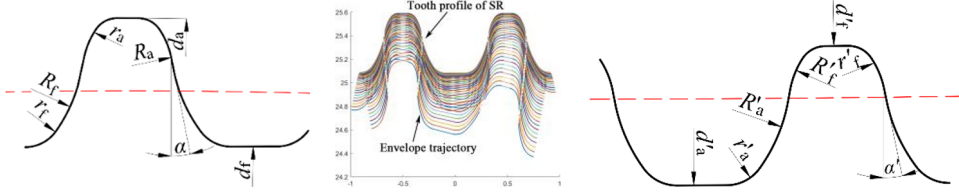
Illustration of: (a) small module tooth (b) tooth envelope (c) splitting roller tooth
